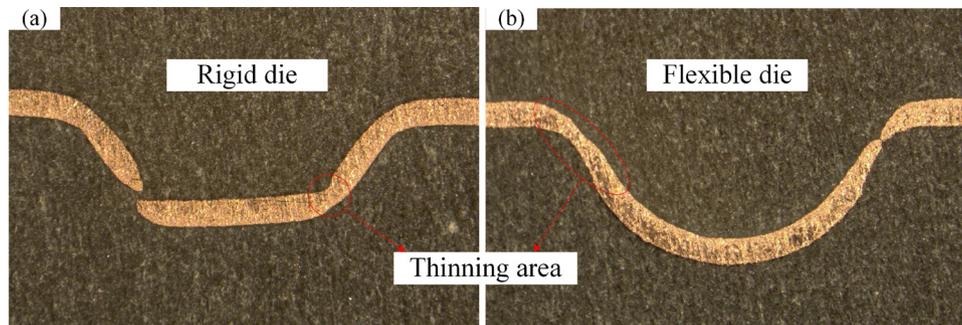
Cross section of fracture of micro flow channel: (a) Rigid die; (b) Flexible die.
